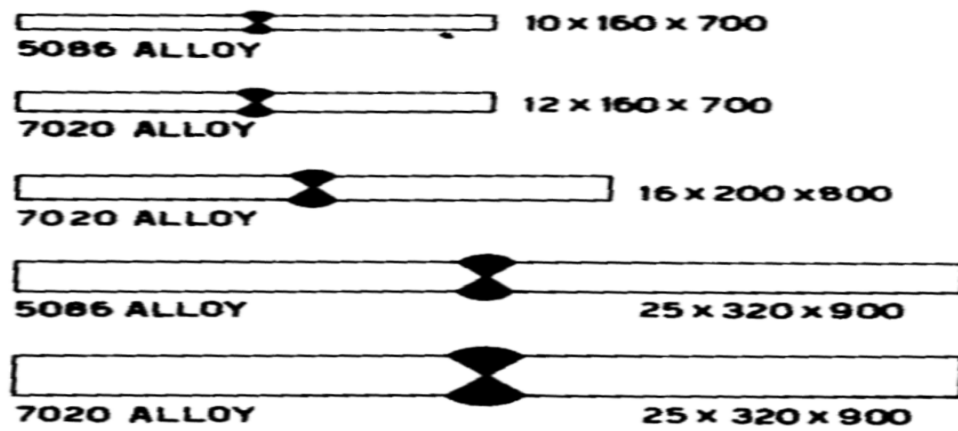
5000 and 7000 series showing welded joints [6].
